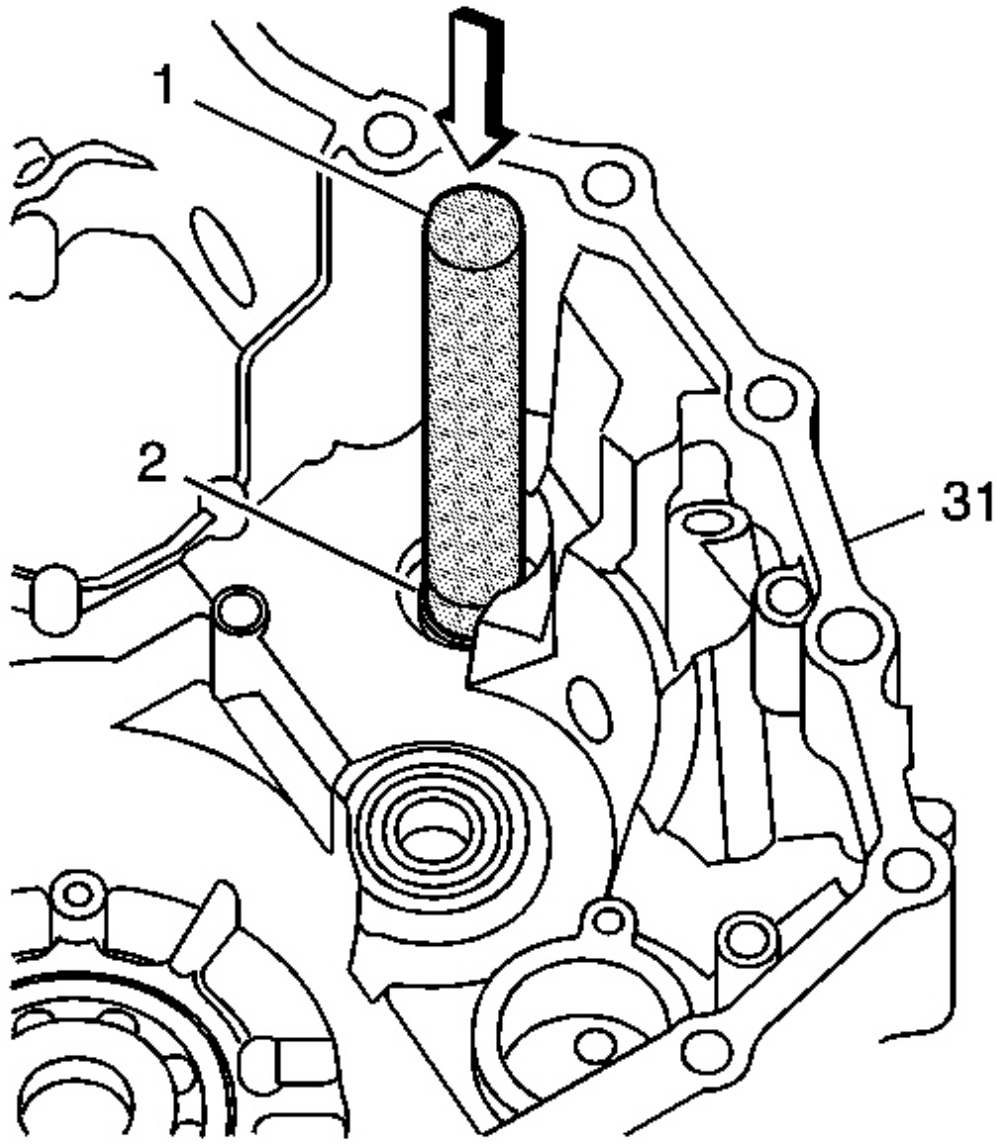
DT 46516, EN 46342 & Manual Shift Shaft Bearing
